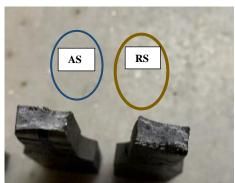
Fracture of three flat threaded tensile specimen at 1400 rpm
